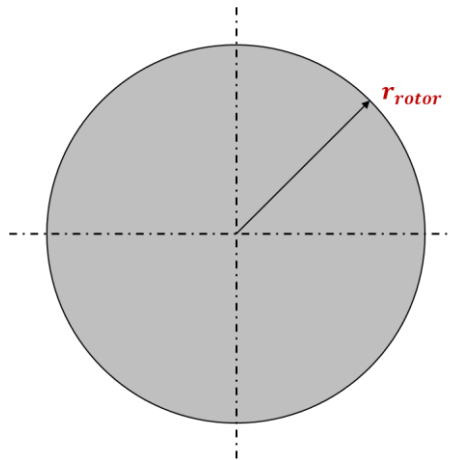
Graphics of the Rotor Pad of the Thrust Bearing
